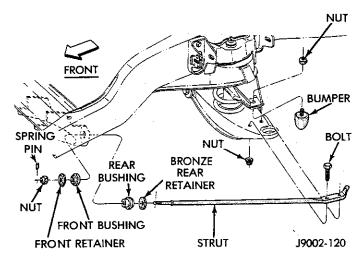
Lower Suspension Arm Strut Removal/ Installation
